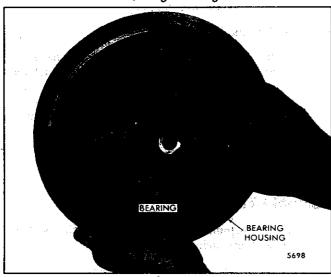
Removing Turbine Shaft Bearing from Bearing Housing
